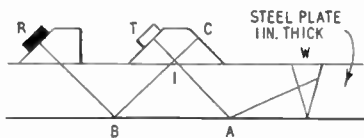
Arrangement of probes for the inspection of a fusion butt weld.
